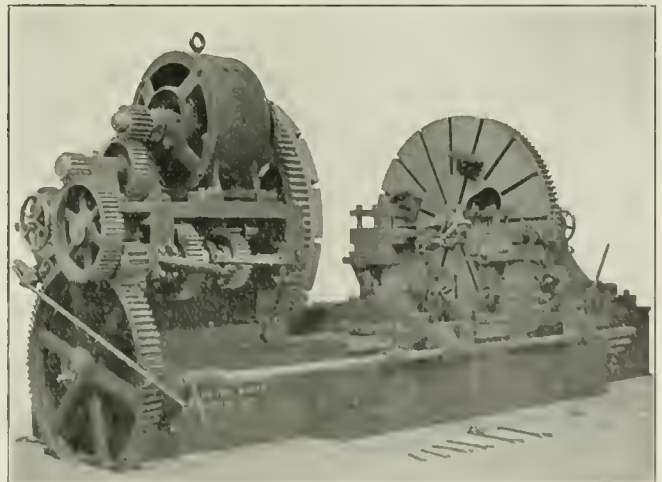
Niles-Bement-Pond 79-in. Standard Driving Wheel Lathe.
